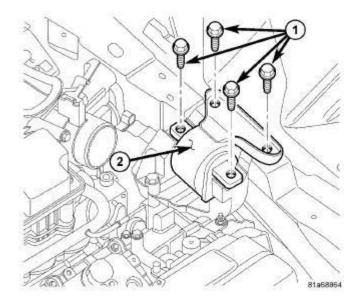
Left Mount Vertical Bolts Courtesy of CHRYSLER LLC
